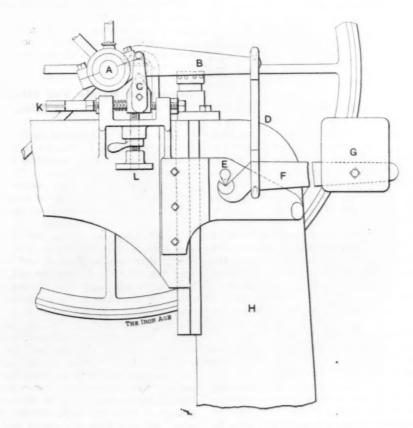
Bearings of Top Wheel Carried on Knife Edges.
